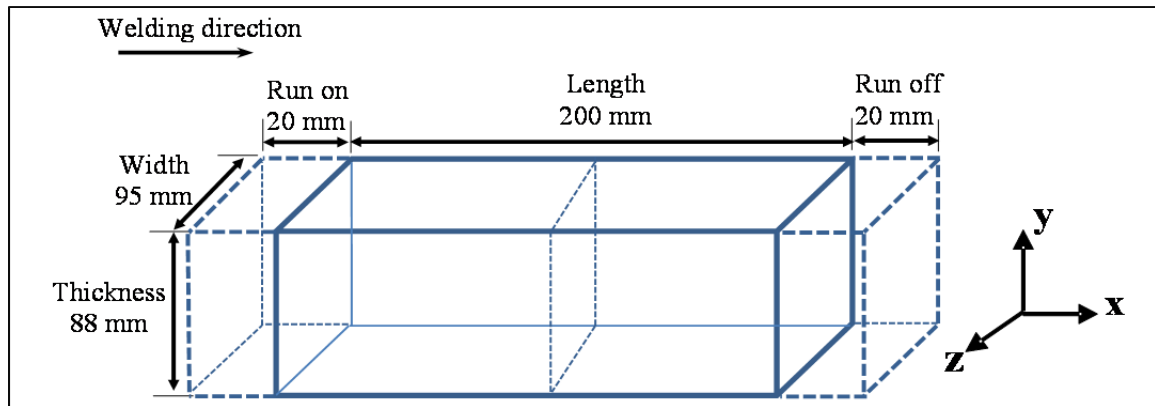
Schematic of the UNS S41500 coupon (with dimensions) used for bead-on-plate welding. The run on and run off tab lengths are indicated
